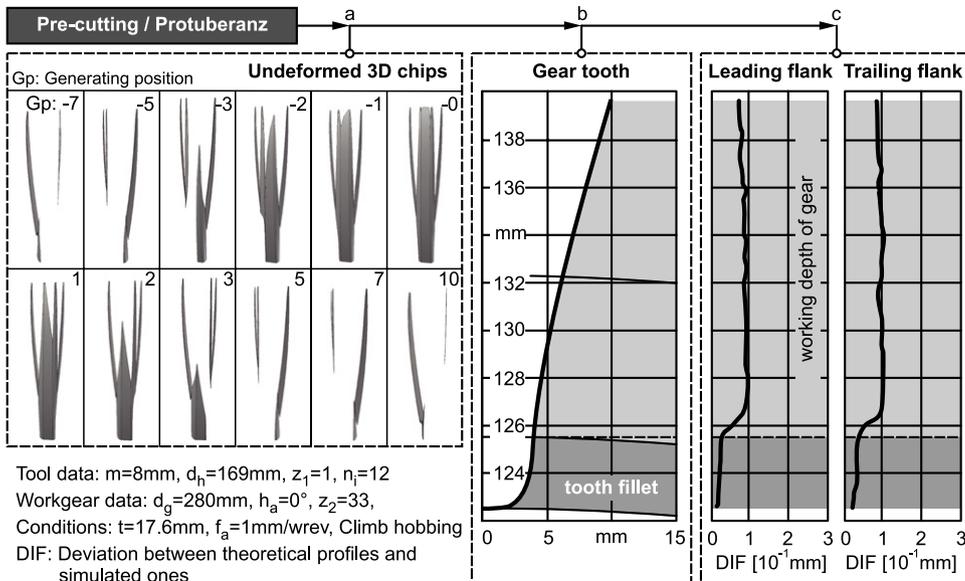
Pre-cutting hobbing with protuberanz tool.
